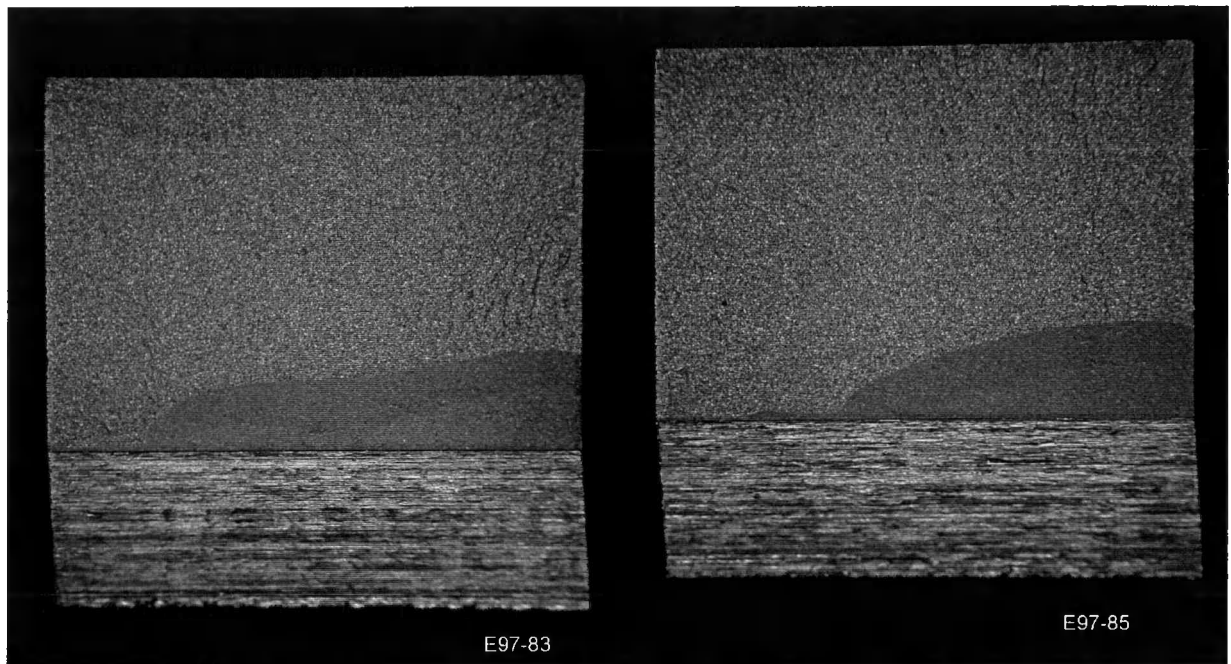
Fracture surfaces of specimens E97-83 and E97-85, showing the invalid fatigue crack propagation.
